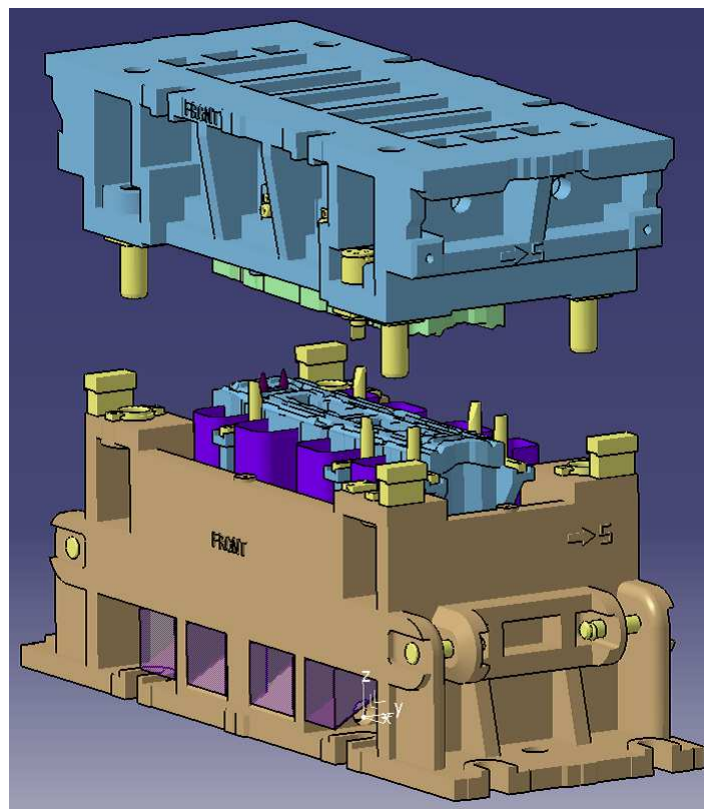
Press die consisting of two major parts, Die Upper and Die Lower
